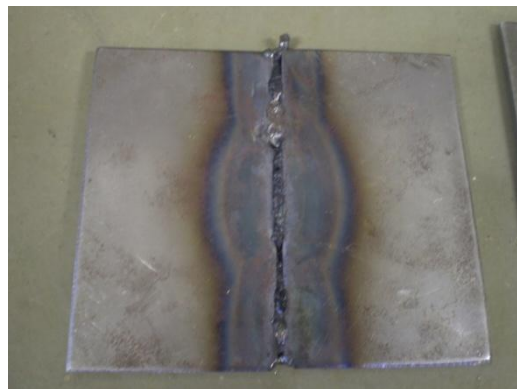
Dorsal surface of the specimen in the welded state.
